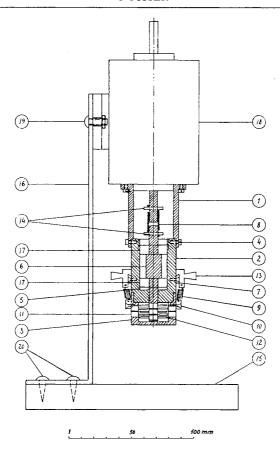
Drawing of the mica pulverizer giving details of the construction. 1. Connecting ring. 2. Ballbearing holder. 3. Container. 4. Screwed disc. 5. Disc. 6. Axle. 7. Ring. 8. Spring. 9. Spring. 10. Spring-fastener. 11. Fixed knives. 12. Rotating knives. 13. Clamp. 14. Pin. 15. Base. 16. Stand. 17. Ballbearing. 18. Motor, 1/10 Hp., 9000 rpm. 19. Nut and bolt. 20. Wood-screws.
